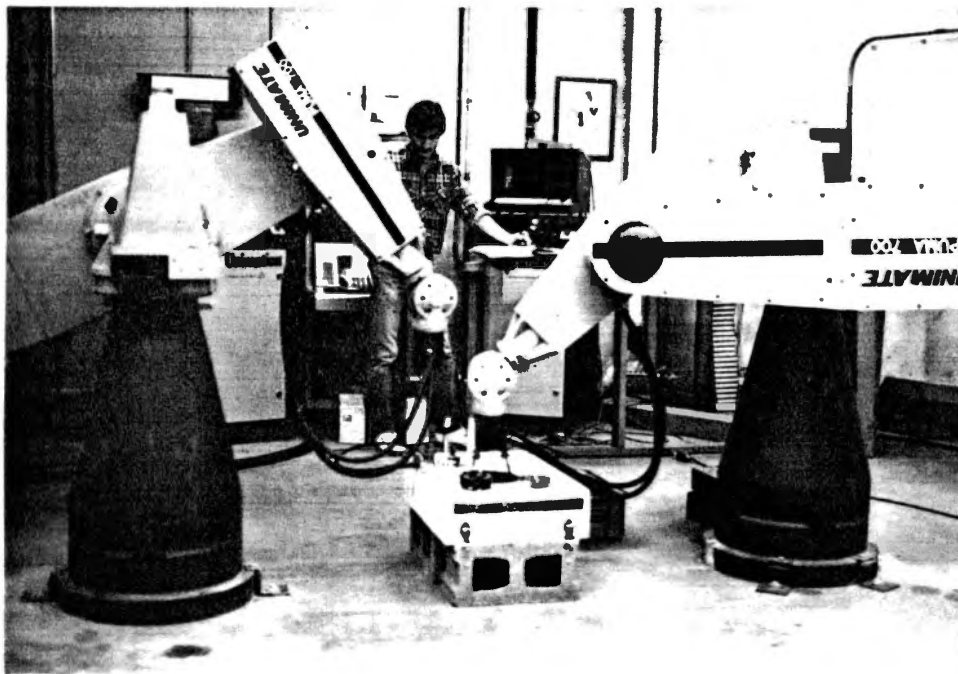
PUMA.2 Executing Placement of Front Bell onto Center Locator Block While PUMA.1 Waits to Grasp Motor Shaft
